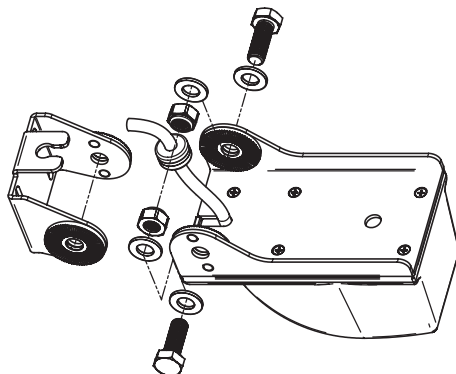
Exploded view: transducer body, cable, bracket arms, pivot bolts, washers and nuts
